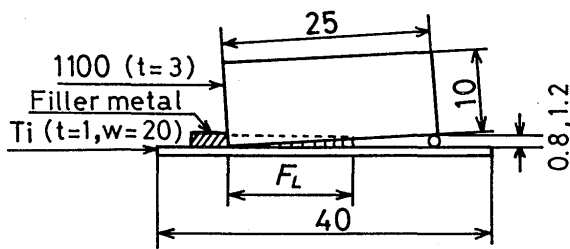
Shape and size of specimen for clearance filling test of Al/Ti joint.
